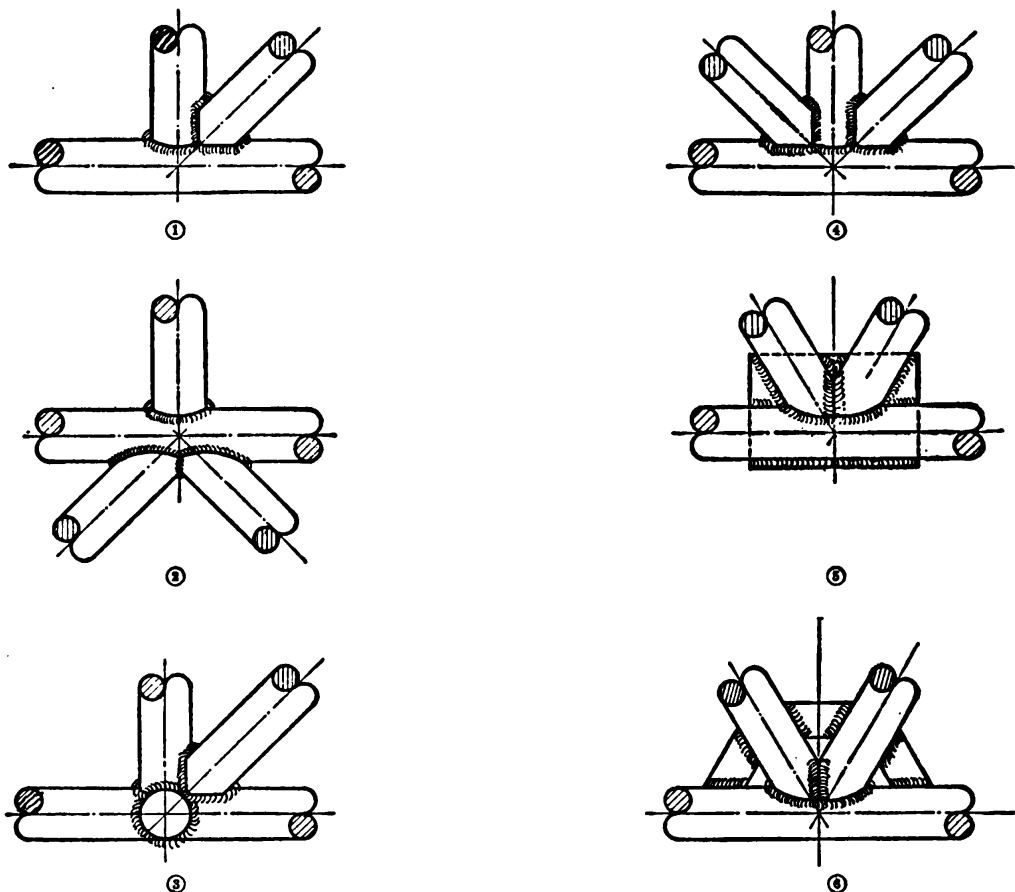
Welded tube clusters and angle joints.
